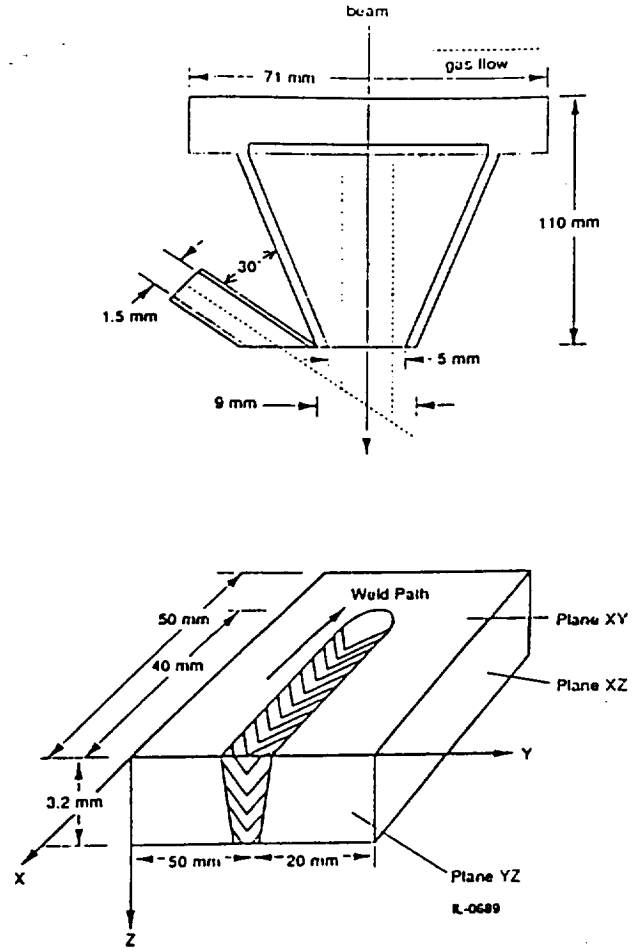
Schematic of Welding Nozzle and Sample
